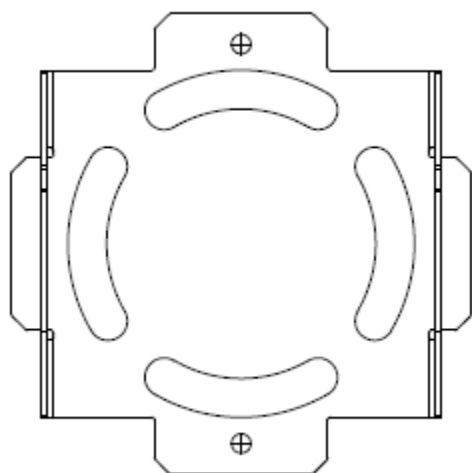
KT-147407-02 bracket 1-axis tilt part front view
